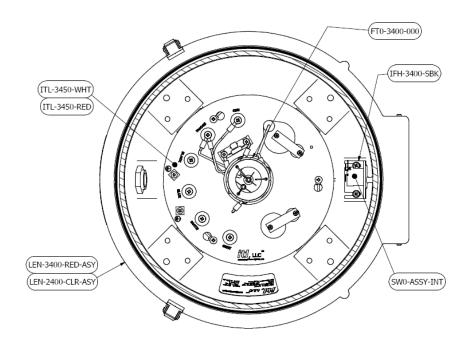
IFH-1400 / IFH-2400 Flash Head Component Layout, Top View
